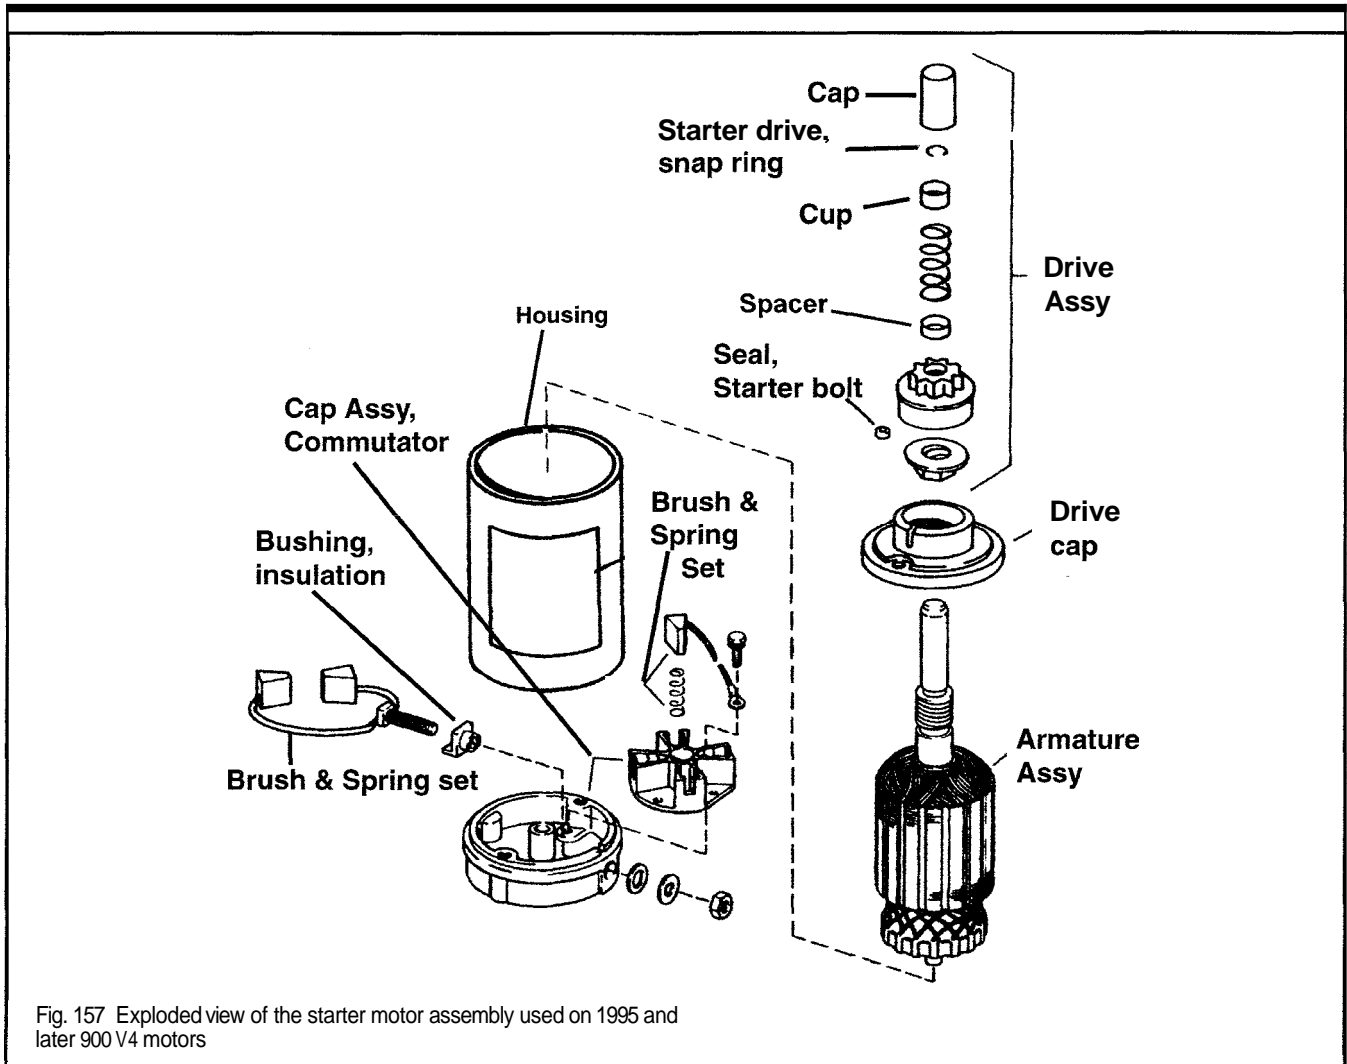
Exploded view of the starter motor assembly used on 1995 and later 900 V4 motors
